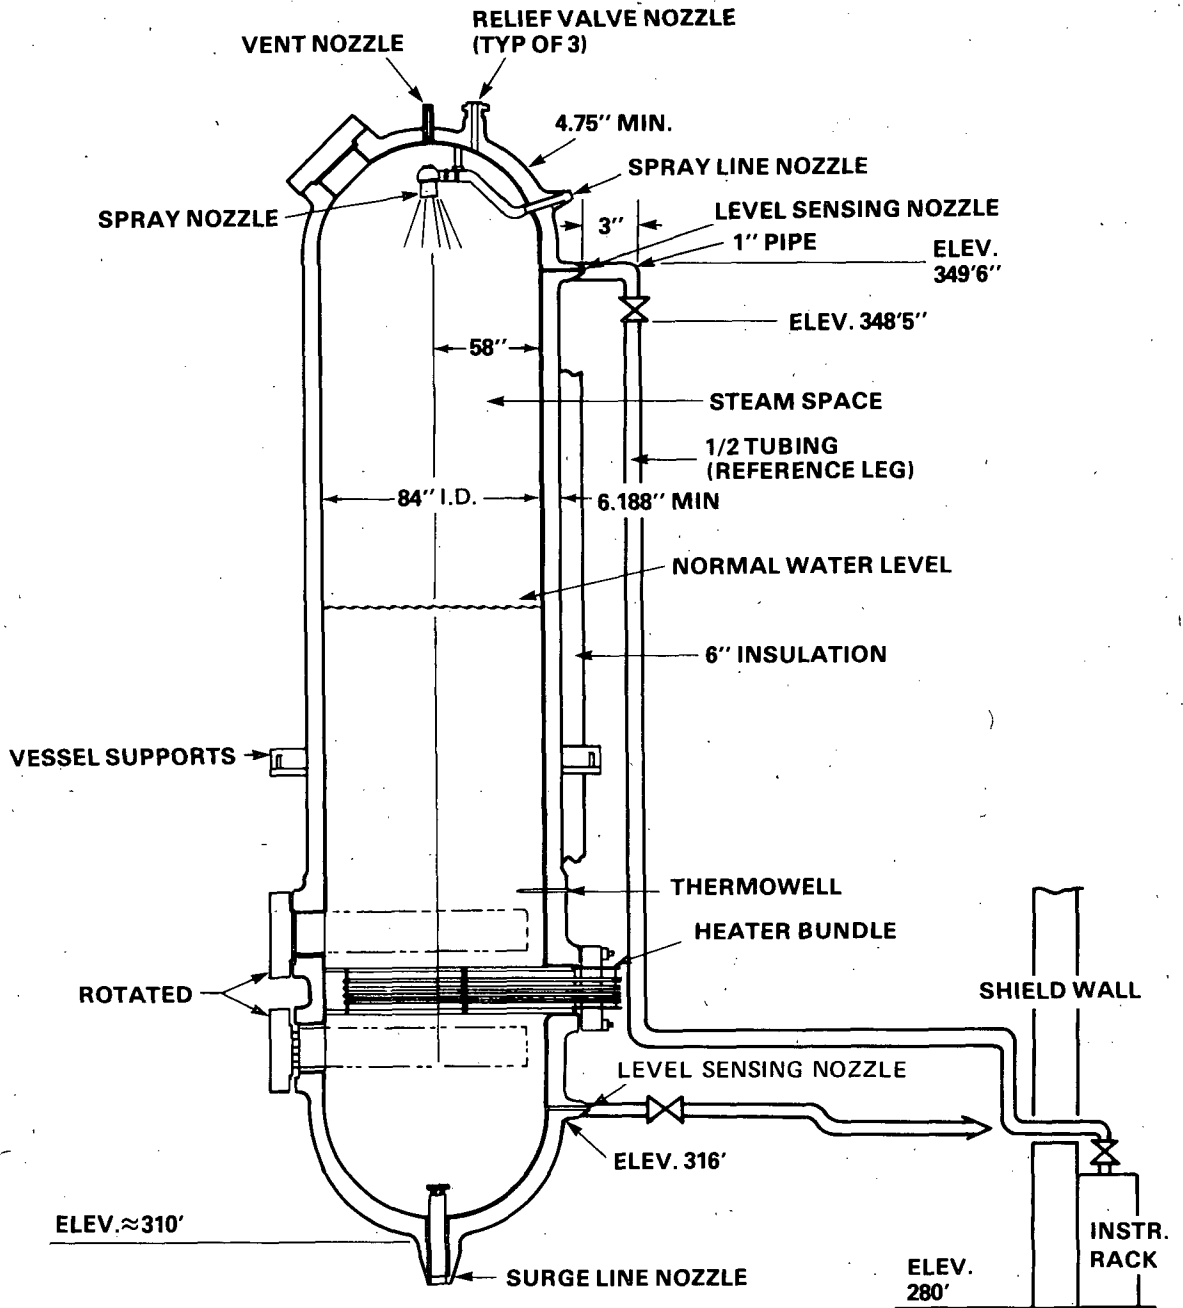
TMI-2 Pressurizer Level Instrument System (typical of all B&W plants).
